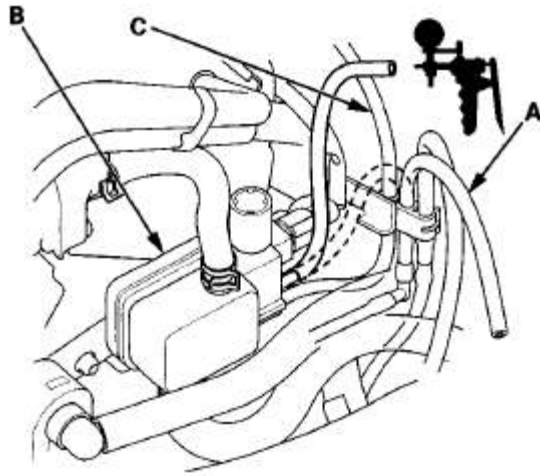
Identifying Vacuum Hoses And Engine Mount Control Solenoid Valve
